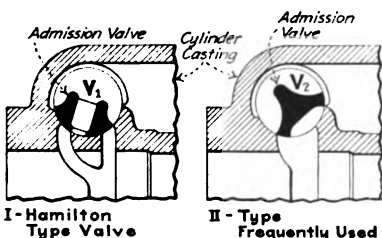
Detaching Corliiss-engine admission valves (Hooven, Owens, Rentschler Company. Valve V_1 is supported its full length at all times. Valve V_2 , when open, is supported only at its ends or by the bridges which may cause it to spring. V_1 weighs somewhat less than V_2 . The cylinder clearance is somewhat less with V_1 than with V_2 .)
